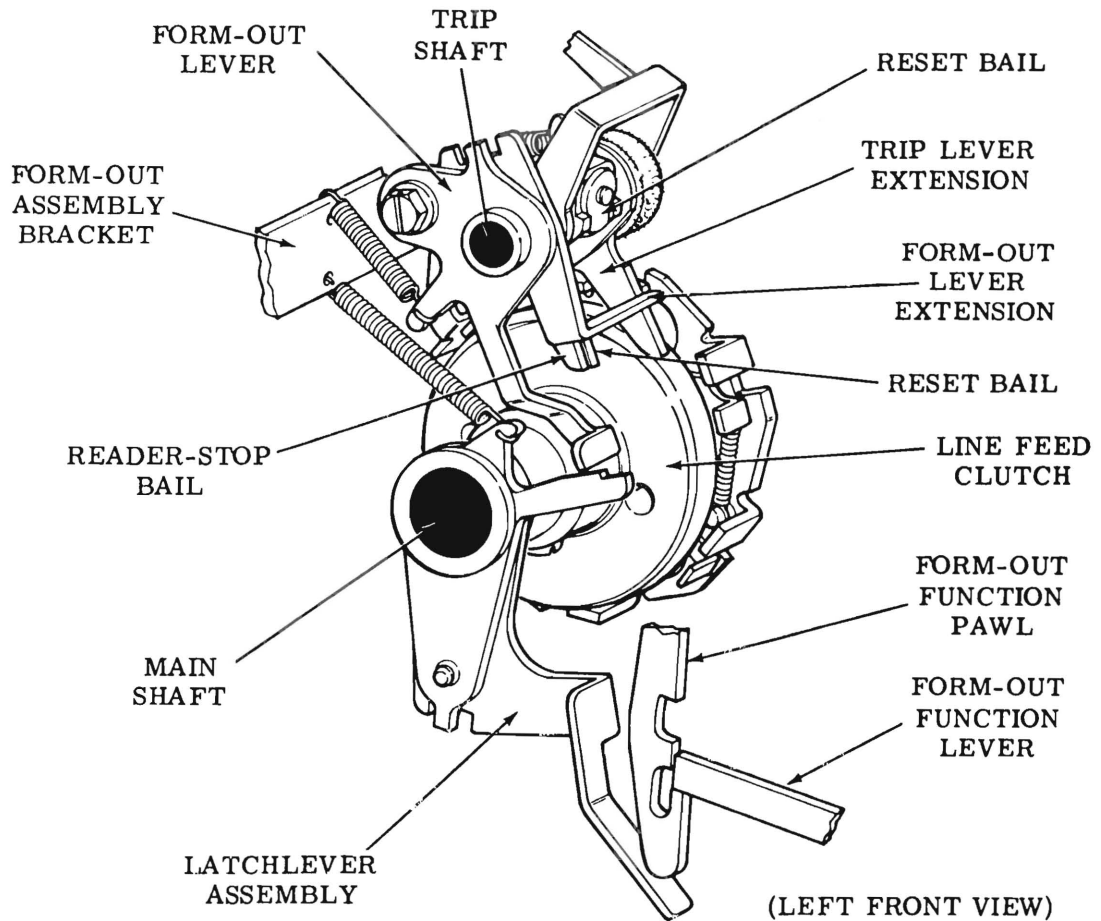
Form-Out Mechanism (Sprocket Feed)
